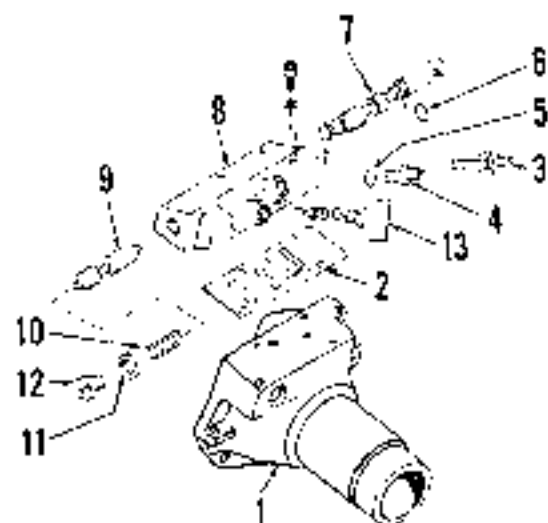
Exploded view of pto clutch pressure regulating valve and associated parts. Multi-Power shift control valve (if so equipped) is also located in the valve body.
